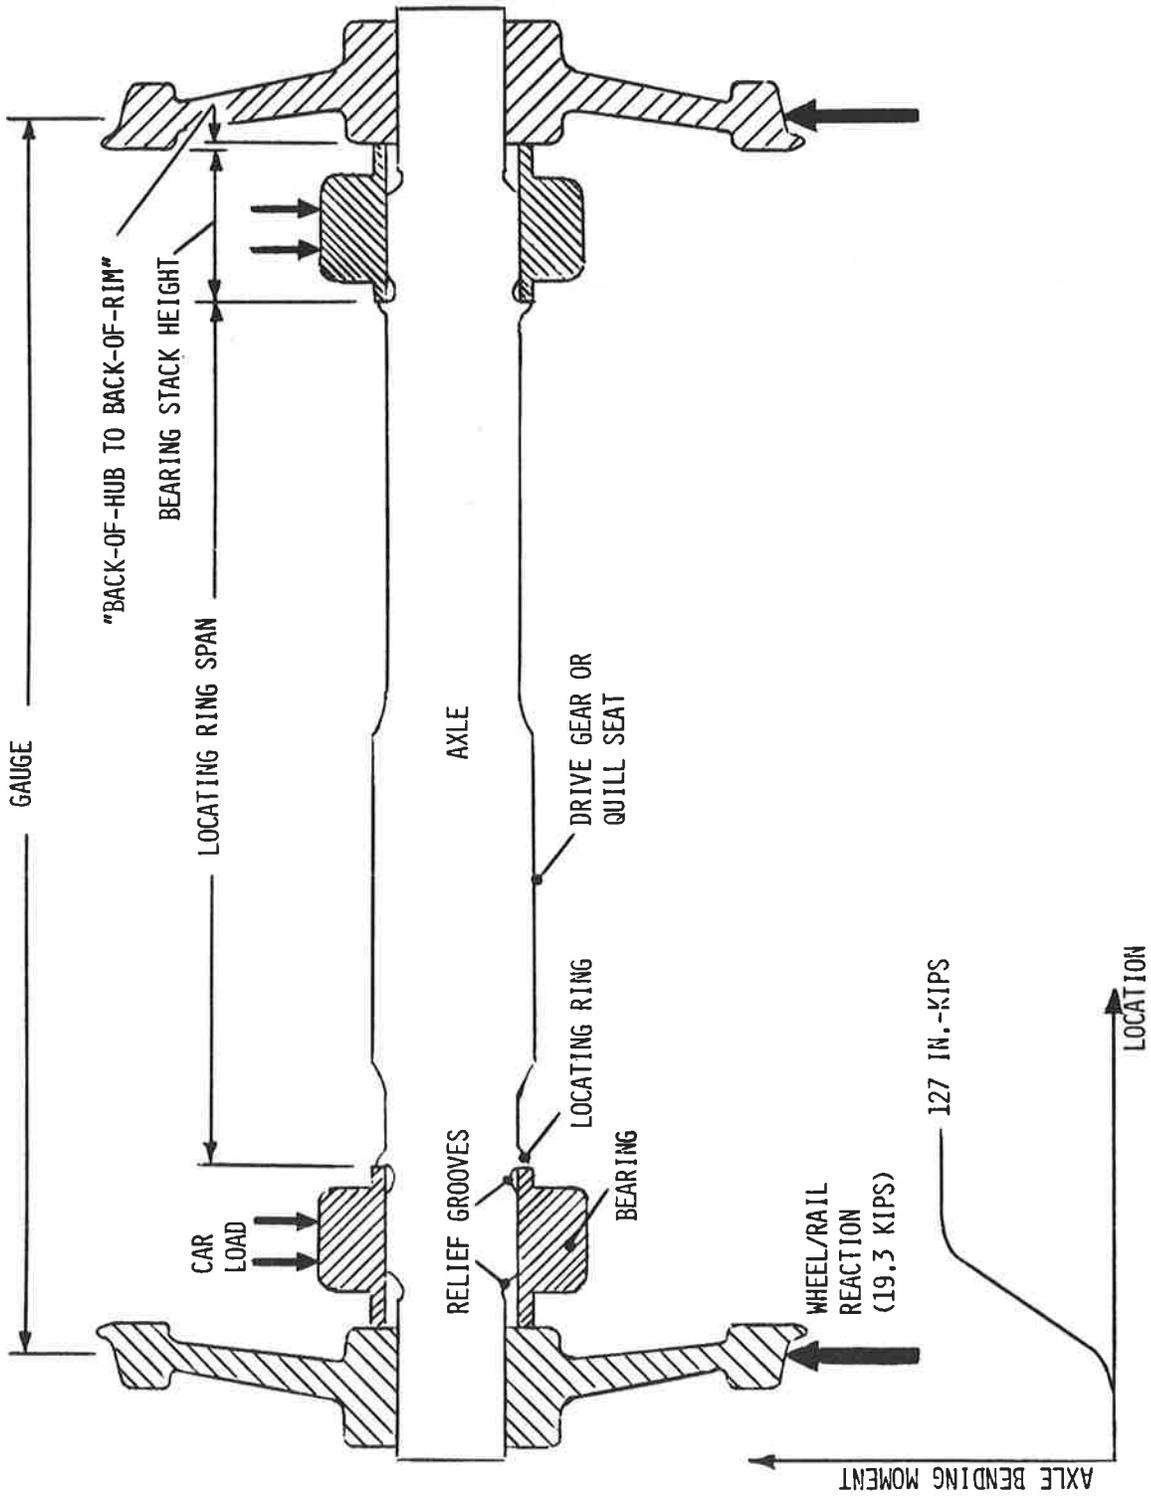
CONFIGURATION AND LOADING OF INBOARD-BEARING WHEELSET
